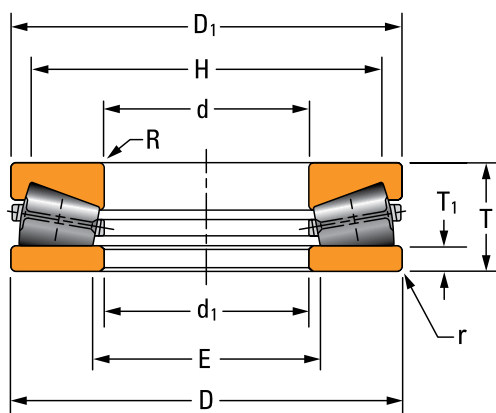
Type TTHDFL thrust tapered roller bearing assembly.
